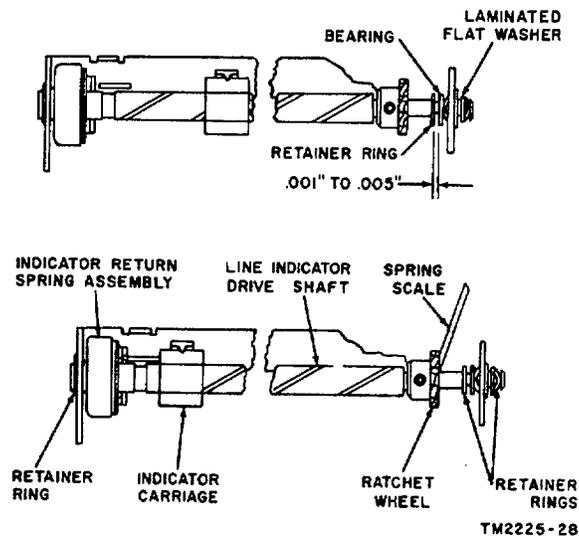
Line indicator adjustments (TT-76/GGC and TT-76A/GC)
